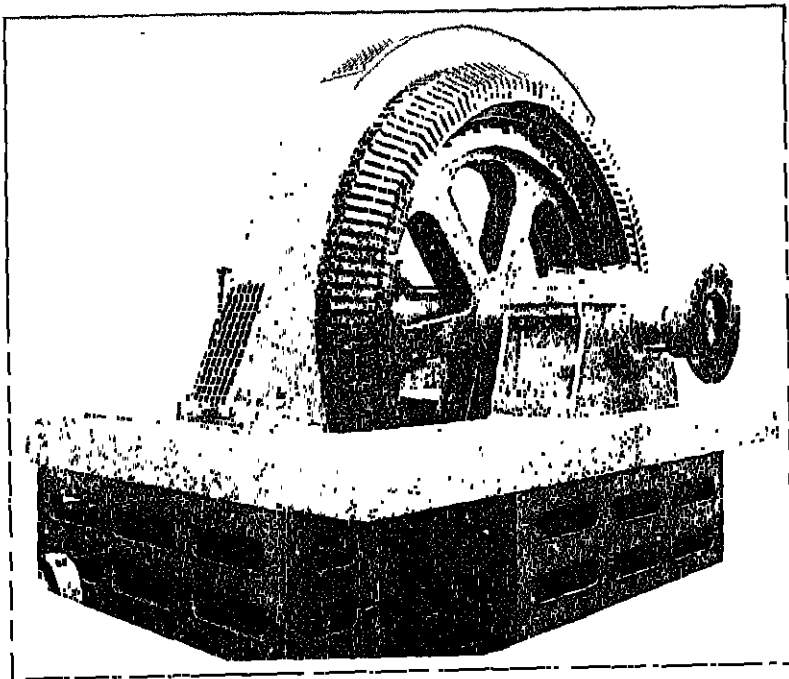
1500-hp, 36-pole, 200-r.p.m., 6600-volt mill type induction motor with welded rolled-steel stator frame.
